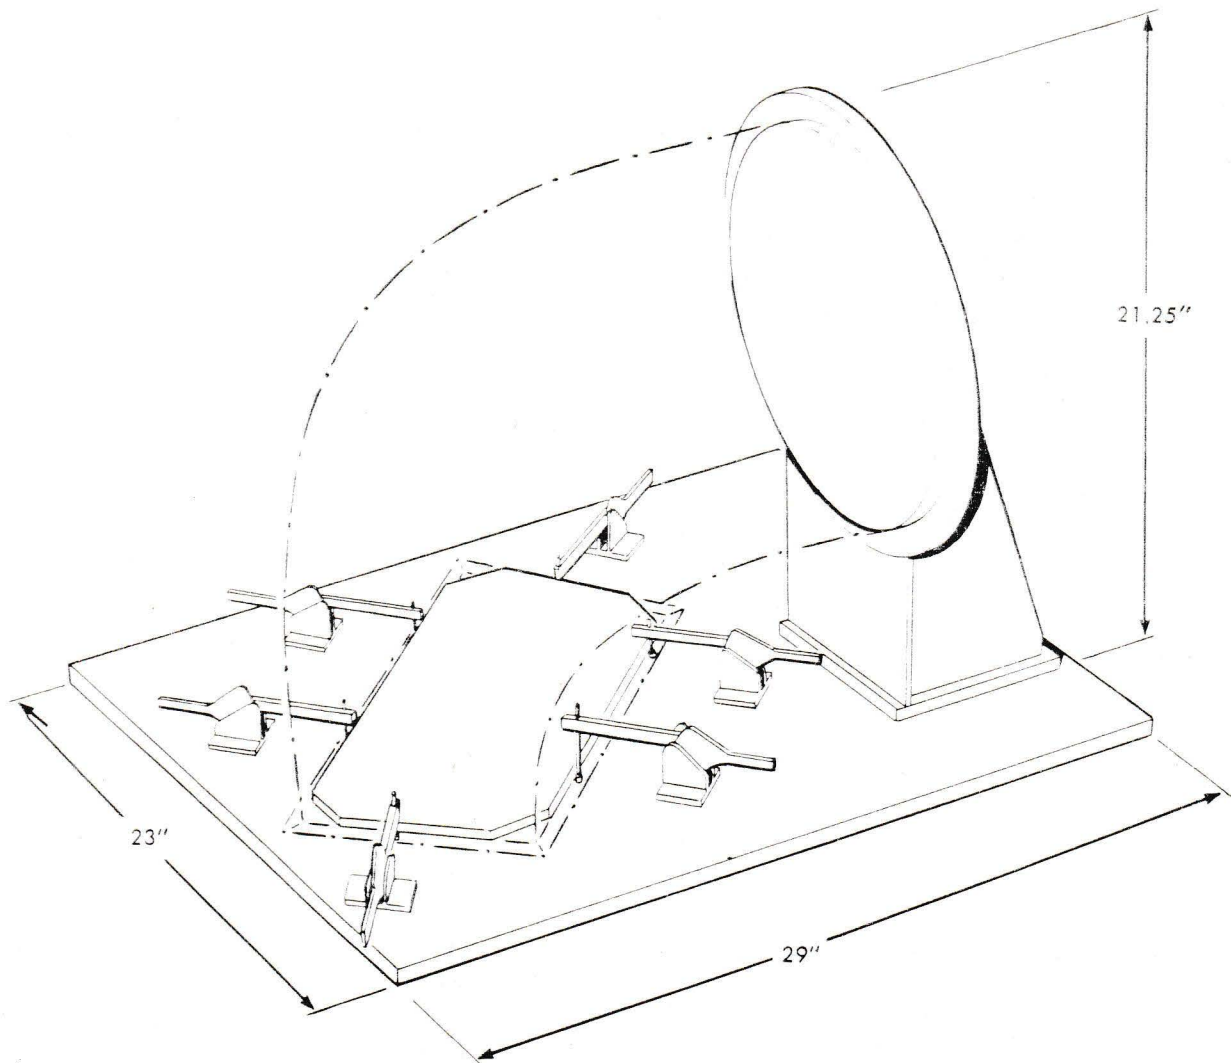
ASSEMBLY JIG FOR ENGINE AIR INTAKE
